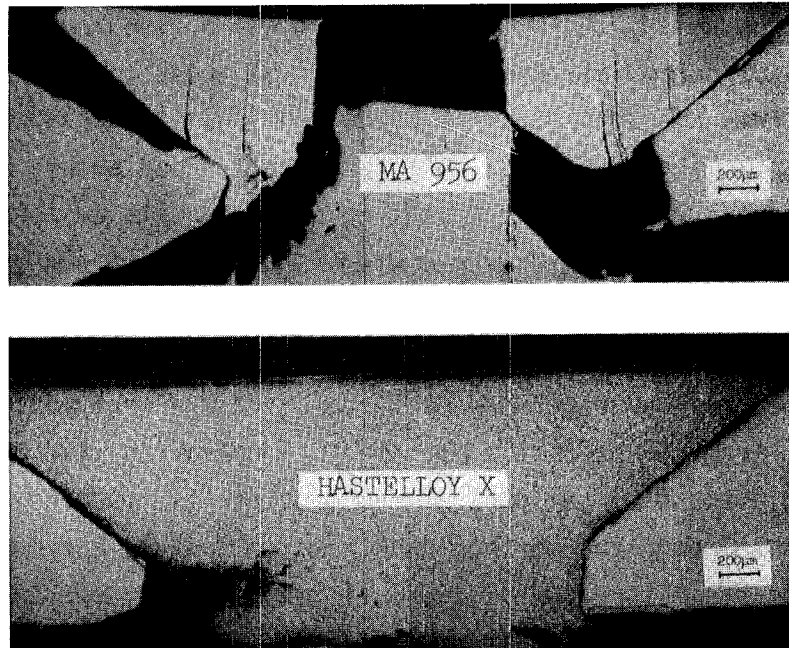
982°C (1800°F) Creep Shear Fracture Microstructures of Riveted Joints
